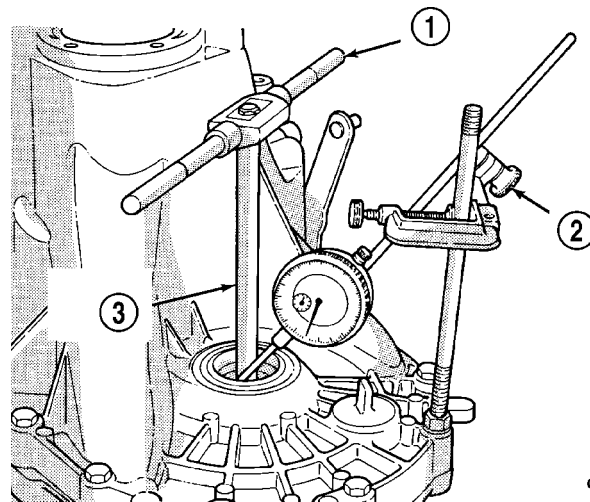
Checking Differential Bearing End Play To Determine Shim Thickness
